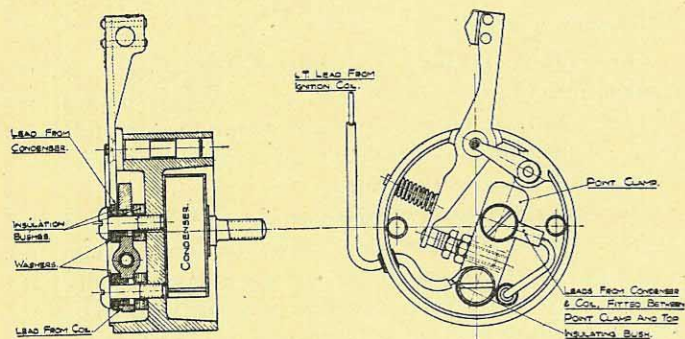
OLD TYPE CONTACT-BREAKER ASSEMBLY.
